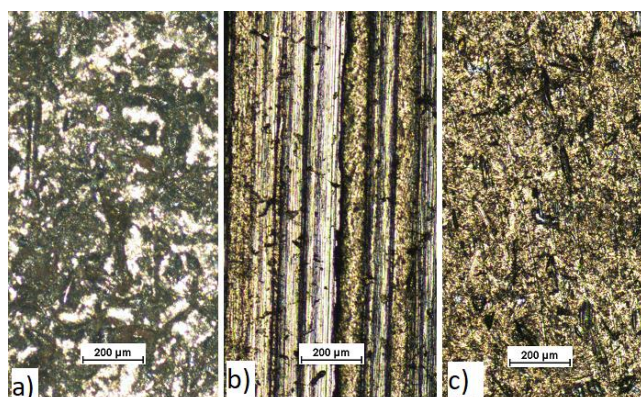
Optical microscopy image of the surface after 40 min vibratory machining with polyester media: a) after blasting, b) after cutting, c) after milling (magnification x10)
